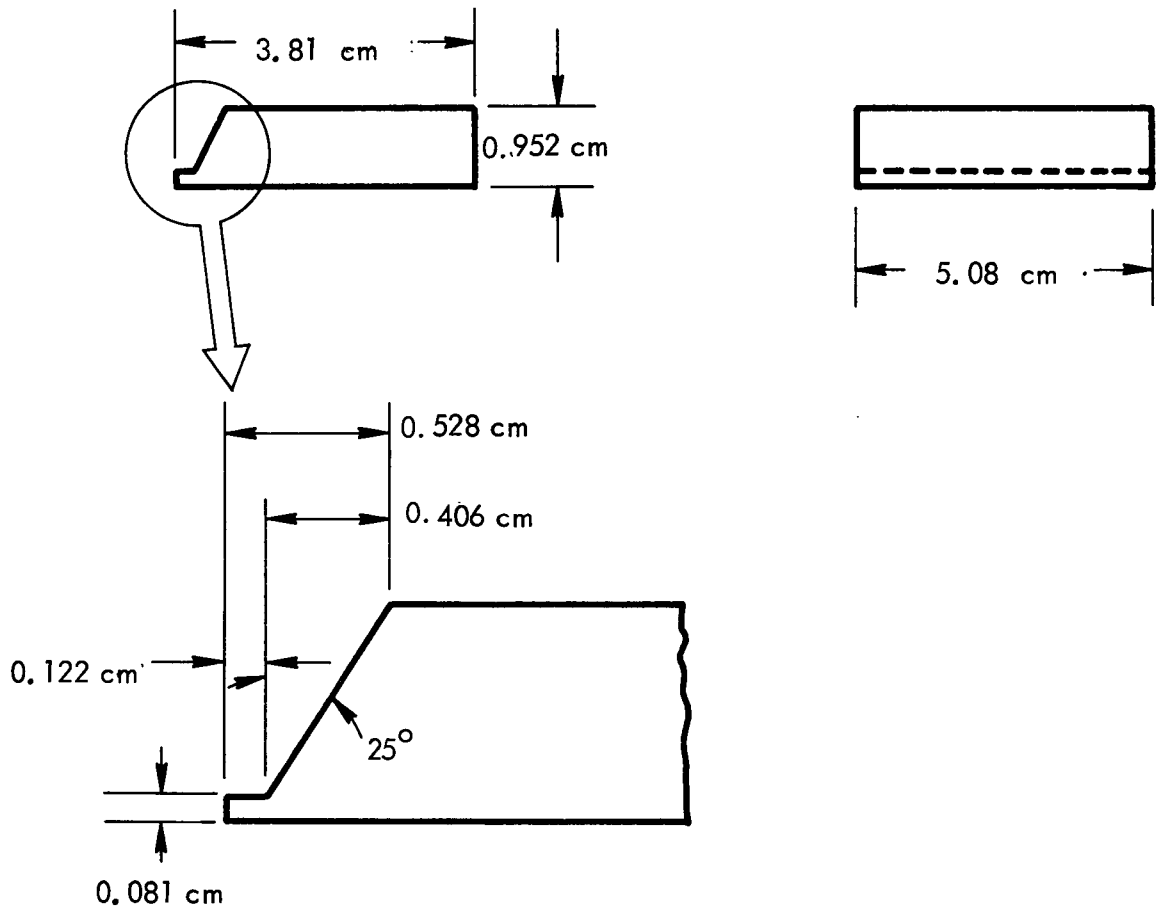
Configuration Used for Single "V" Plate Welds
